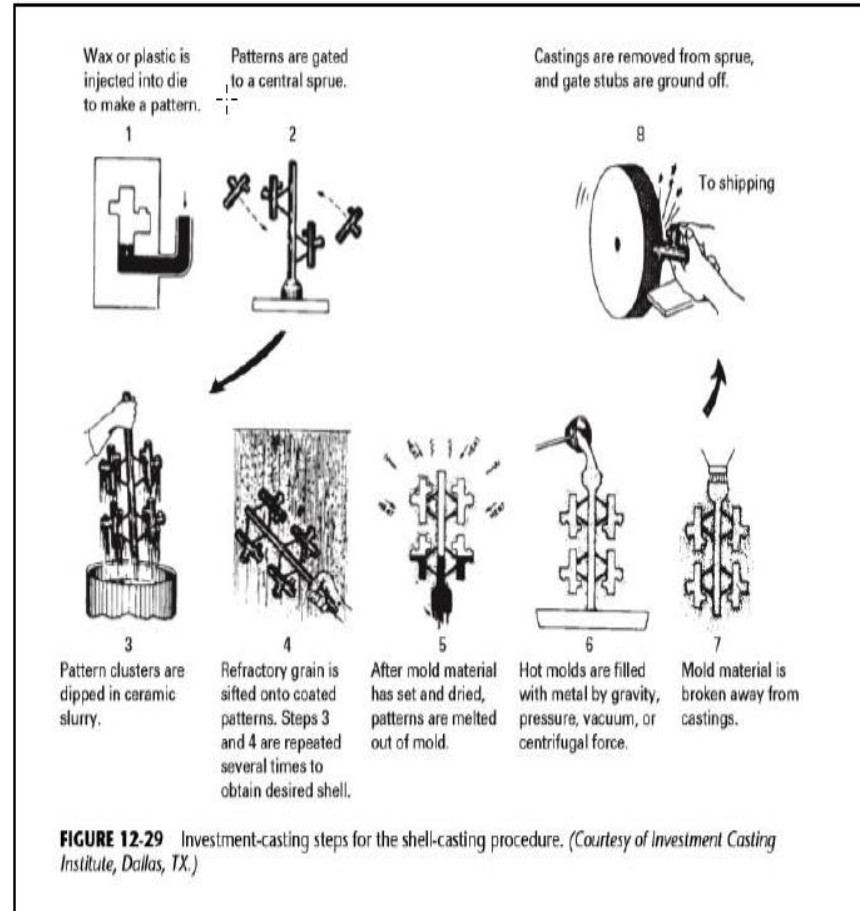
Investment-casting steps for the shell-casting procedure. (Courtesy of Investment Casting Institute, Dallas, TX.)
